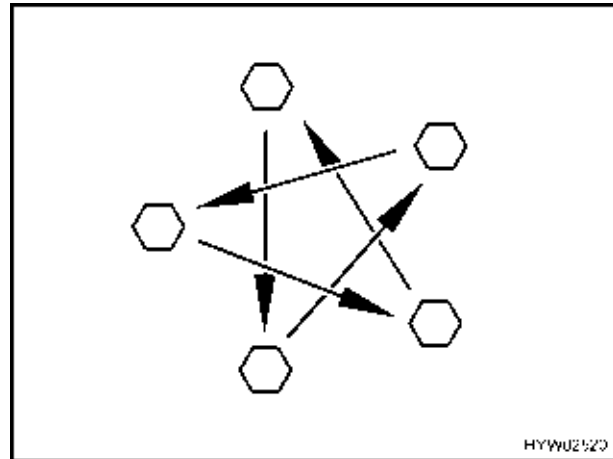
Tighten the wheel nuts or wheel bolts cross-wise
